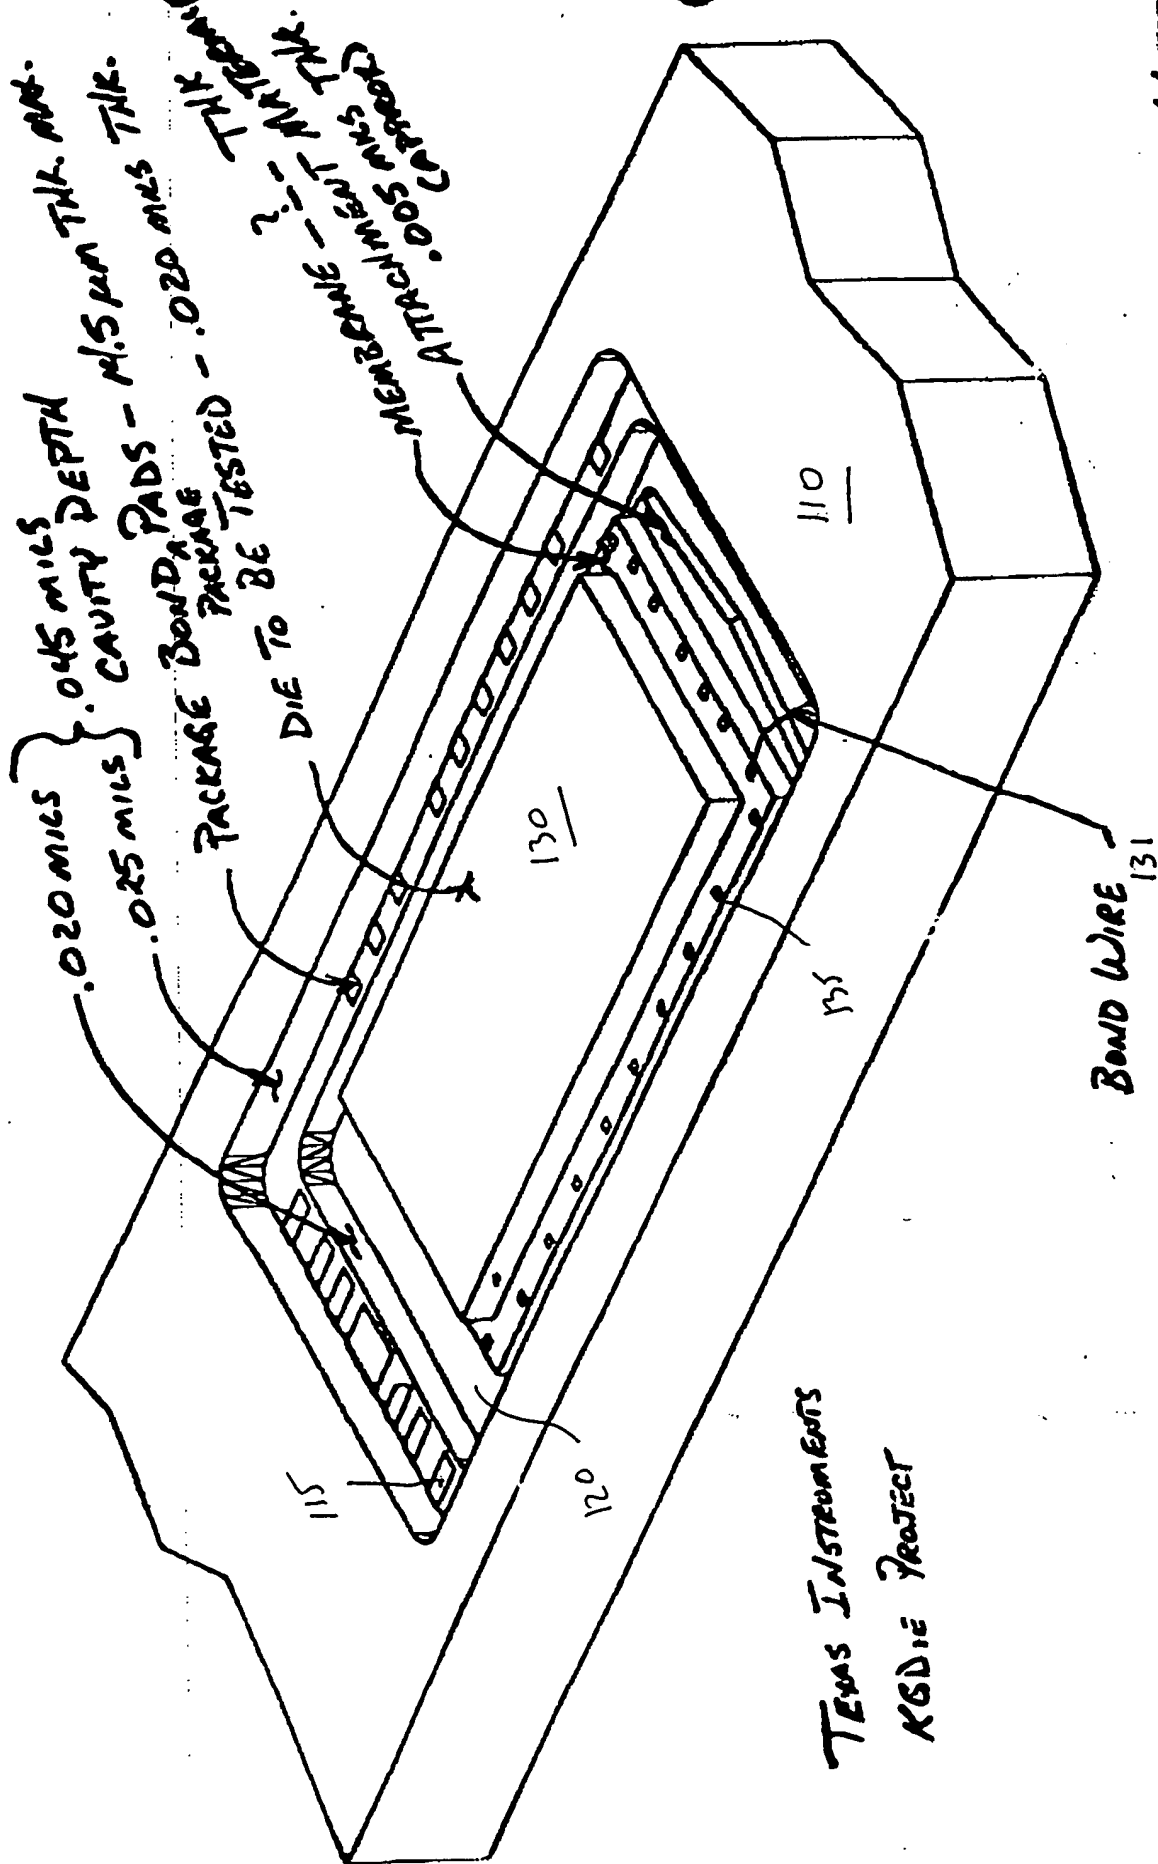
Flip Configuration of K6DIE Package, Exploded View
